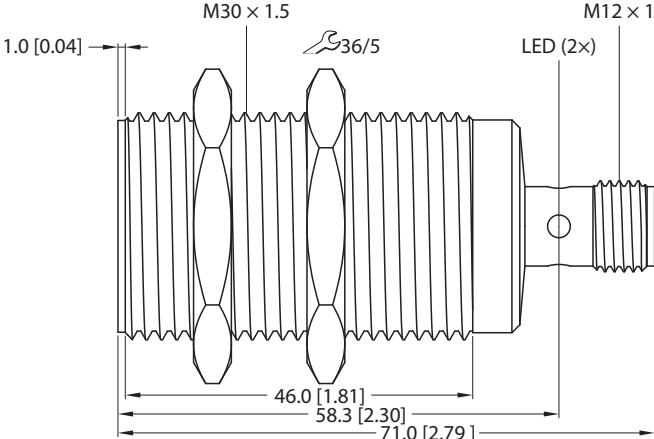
Dimensional drawing BI12-M30-2APS8X2-H1141
